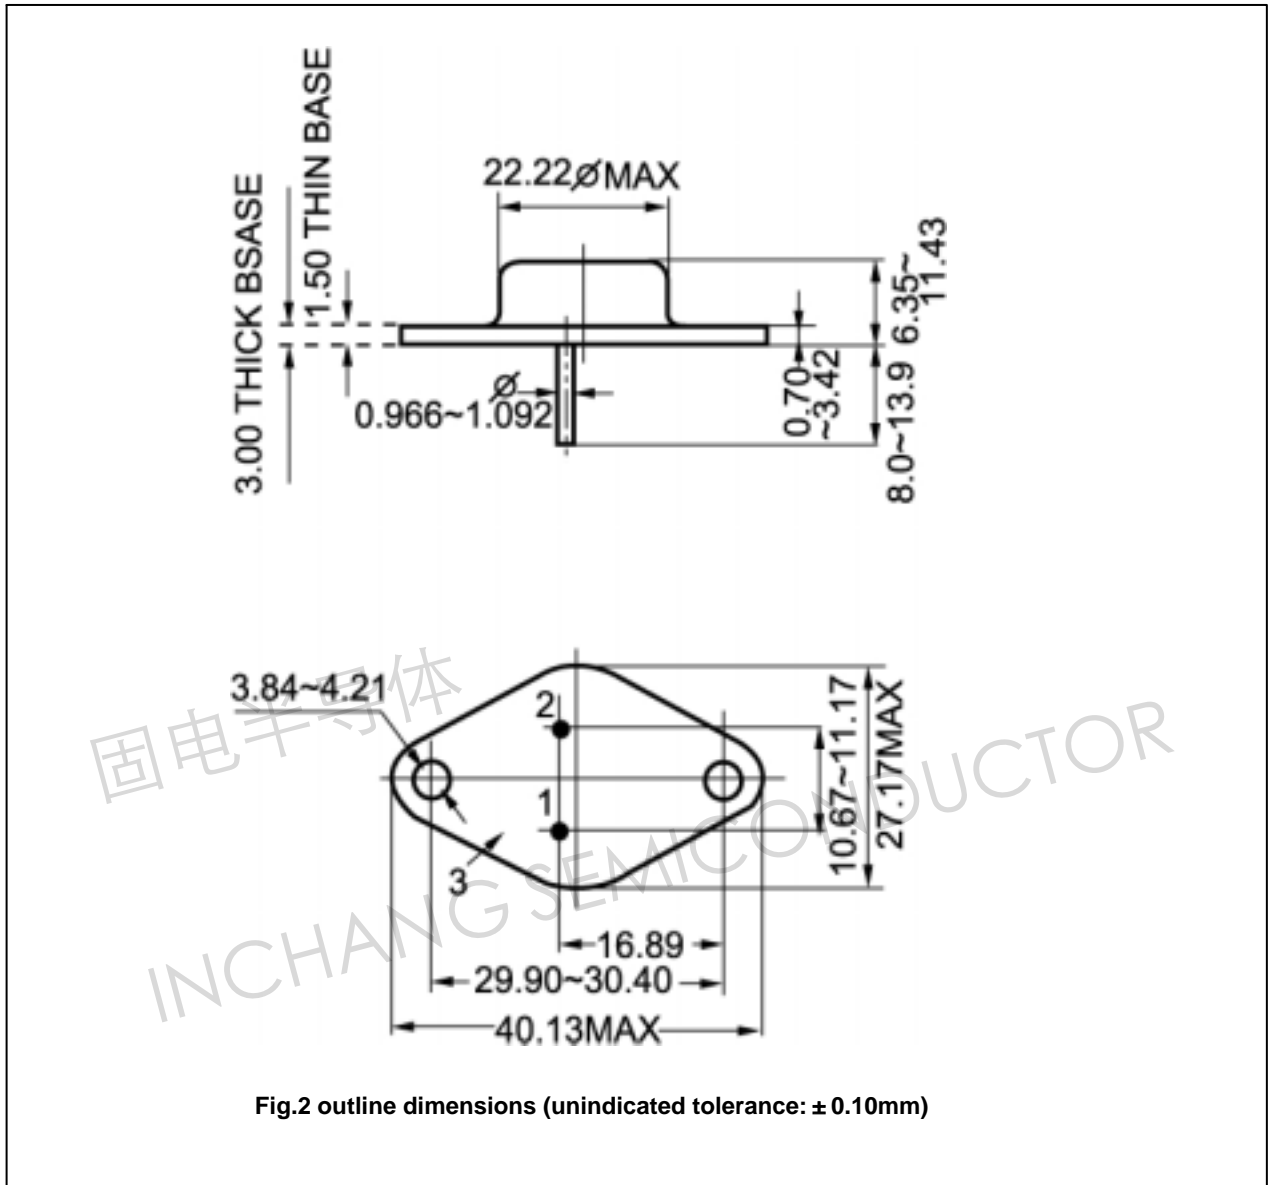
outline dimensions (unindicated tolerance:  $\pm 0.10\text{mm}$ )
